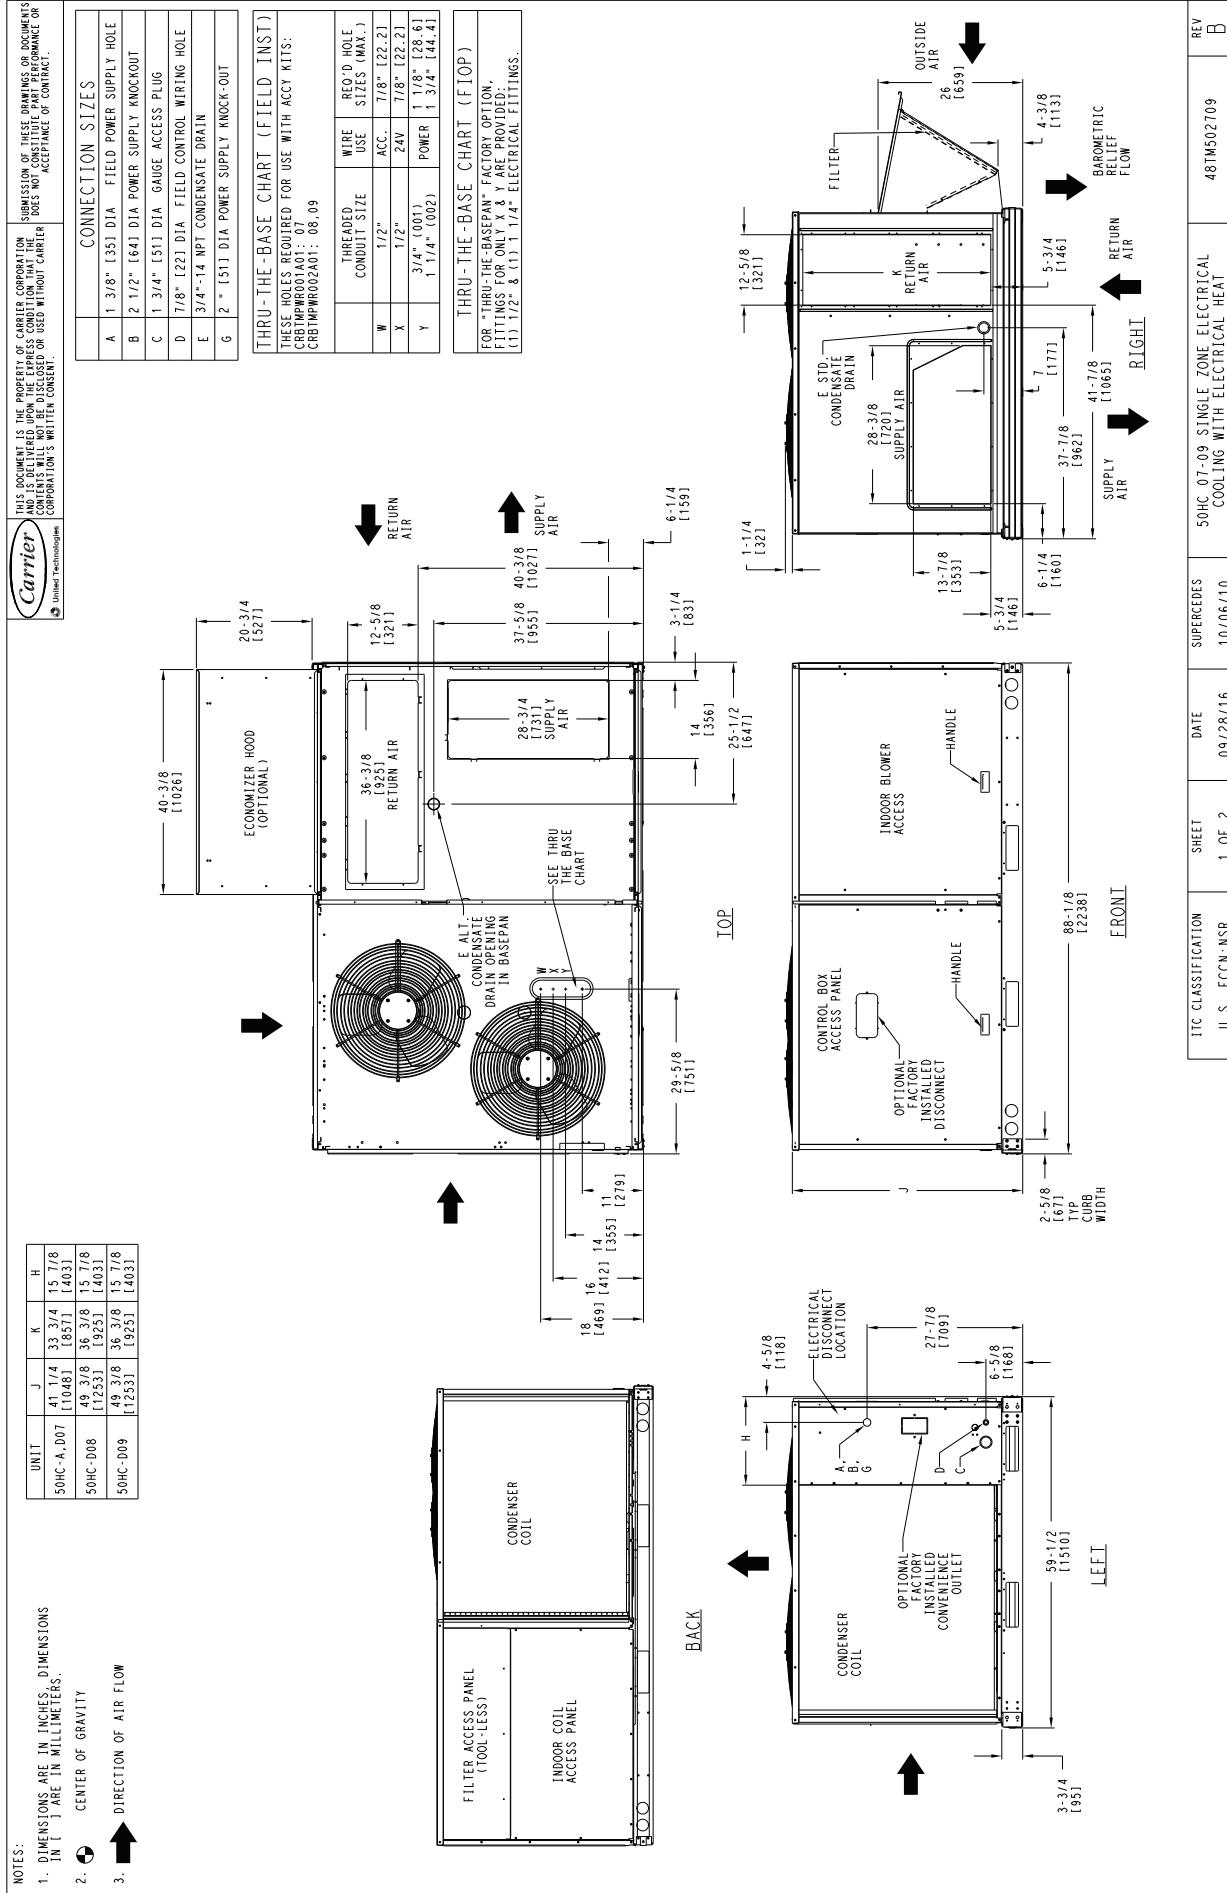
50HC07-09 Base Unit Dimensions
